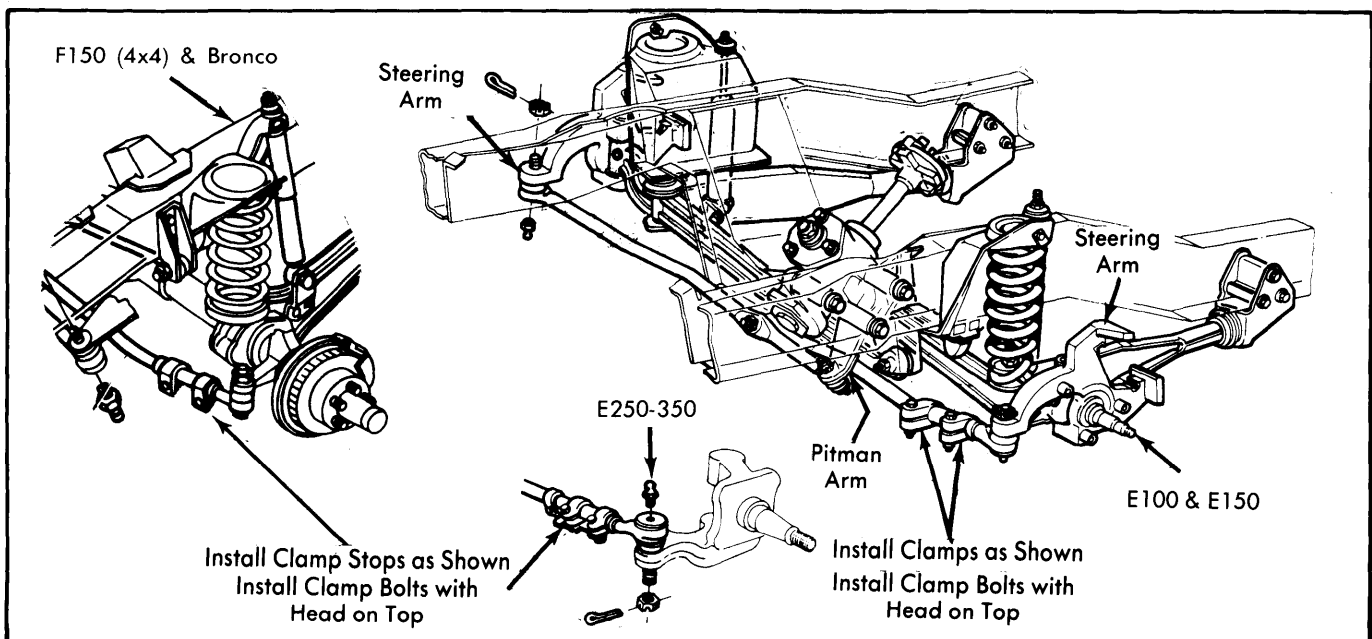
Steering Linkage & Front Suspension Components "E" Models, F150 4-WD and Bronco Models; "F" Models Similar
